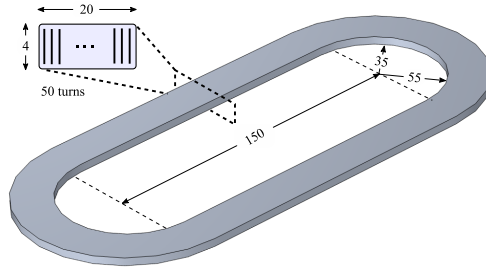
Geometry and dimensions of the racetrack coil under study [56]. The coil is made with 50 turns of HTS tape, which creates a stack 4 mm wide and 20 mm height in the cross-section of the coil. All the dimensions are in millimeters.
